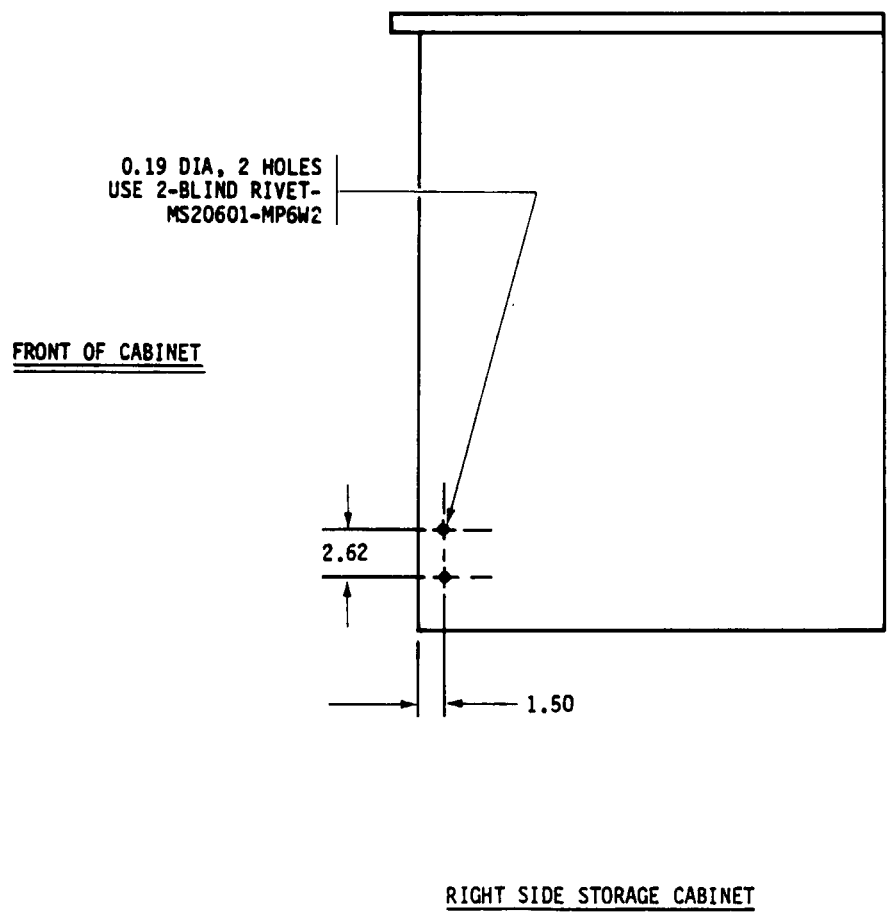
Hole Dimensions for Blind Rivets, Unit 3, M35A2, Cabinet Side.
